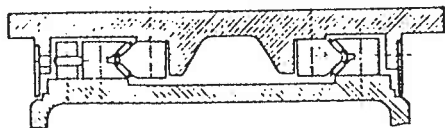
Accurate setting made possible by roller-slides of a centreless grinding machine (Herminghausen).
